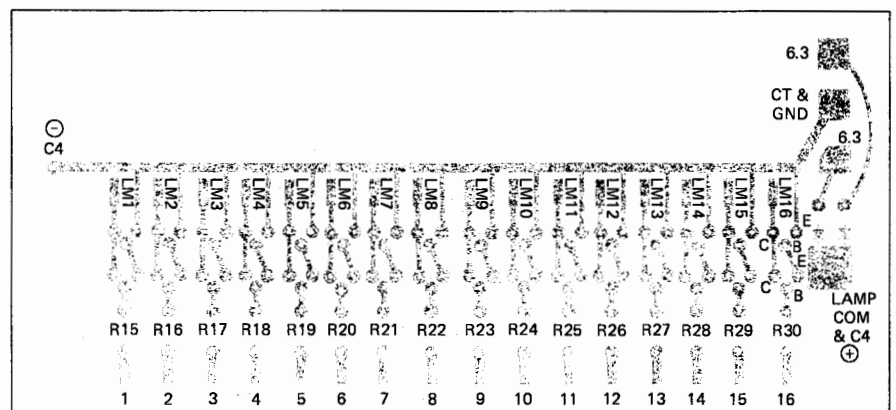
(top)—MATRIX SWITCH layout. See cover photo for 14- and 16-pin DIP settings. FIG. 3—POWER SUPPLY for 5 volts regulated to step and clock circuits and the IC under test. FIG. 7-b (right)—PARTS LAYOUT for lamp-driver board. The C-B-E terminals at right are for Q35 and Q36. Transistor pairs Q5—Q6 through Q33—Q34 are positioned from left to right.
